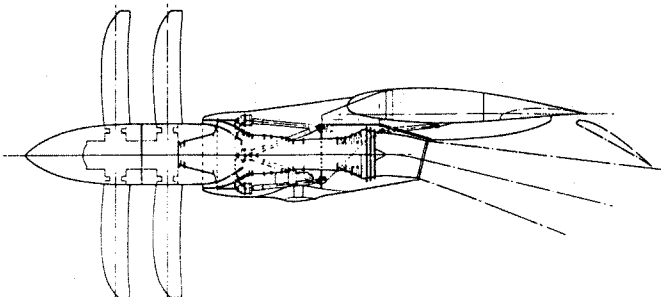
Wing-Mounted Open Rotor Powerplant Installation
